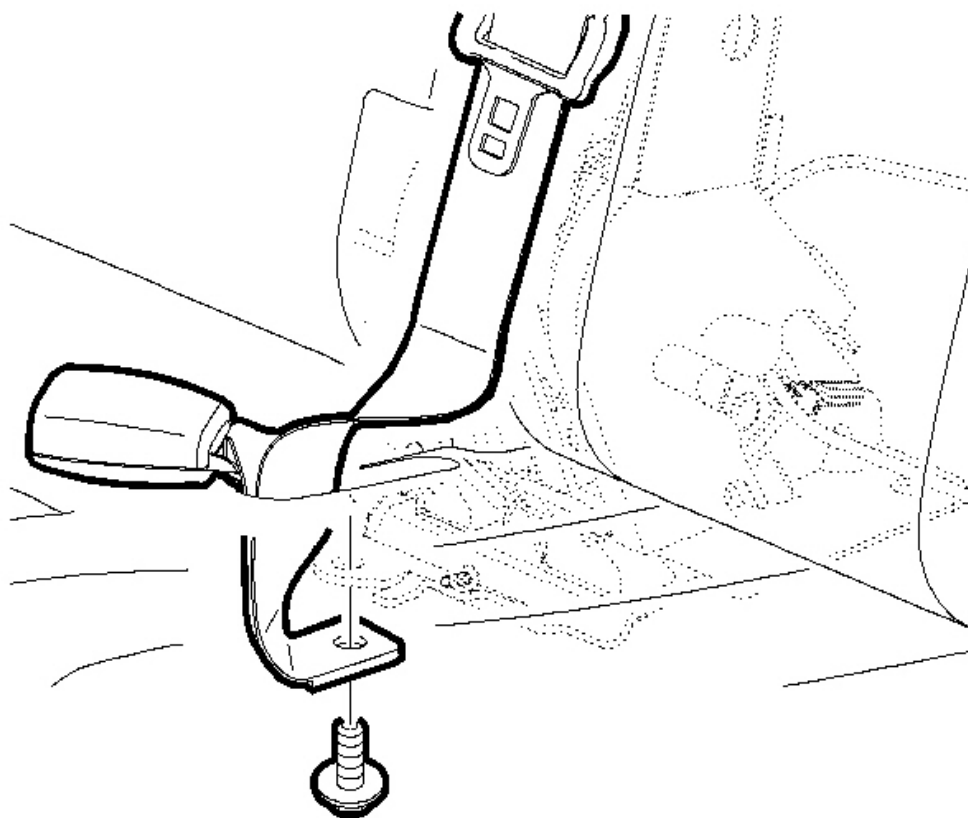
Removing/Installing Shoulder Belt Anchor Bolt & Plate
